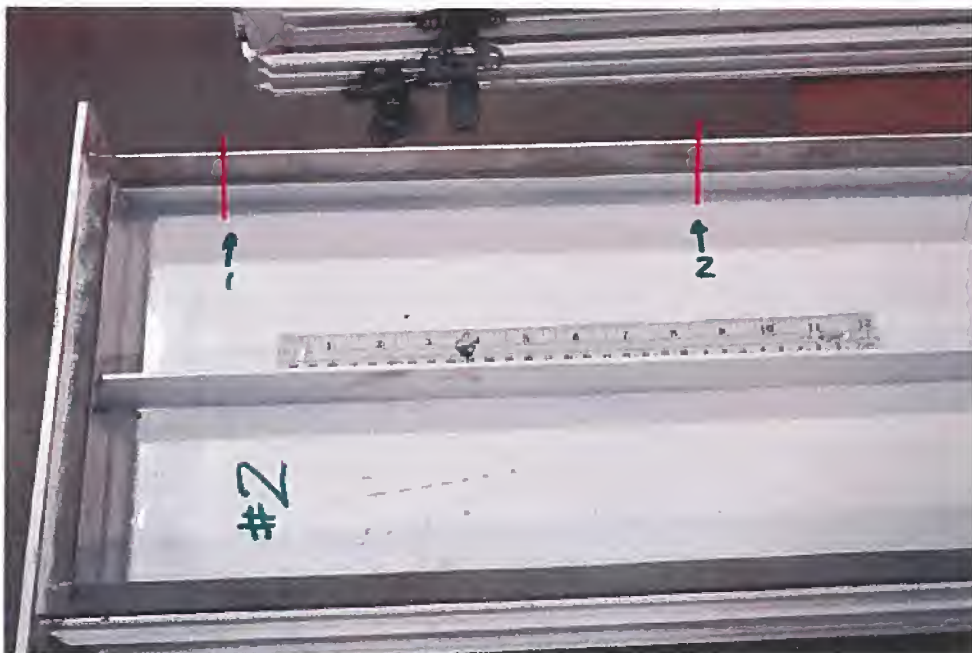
Sample #2: The transverse cross-section location for 2-1 and 2-2.
